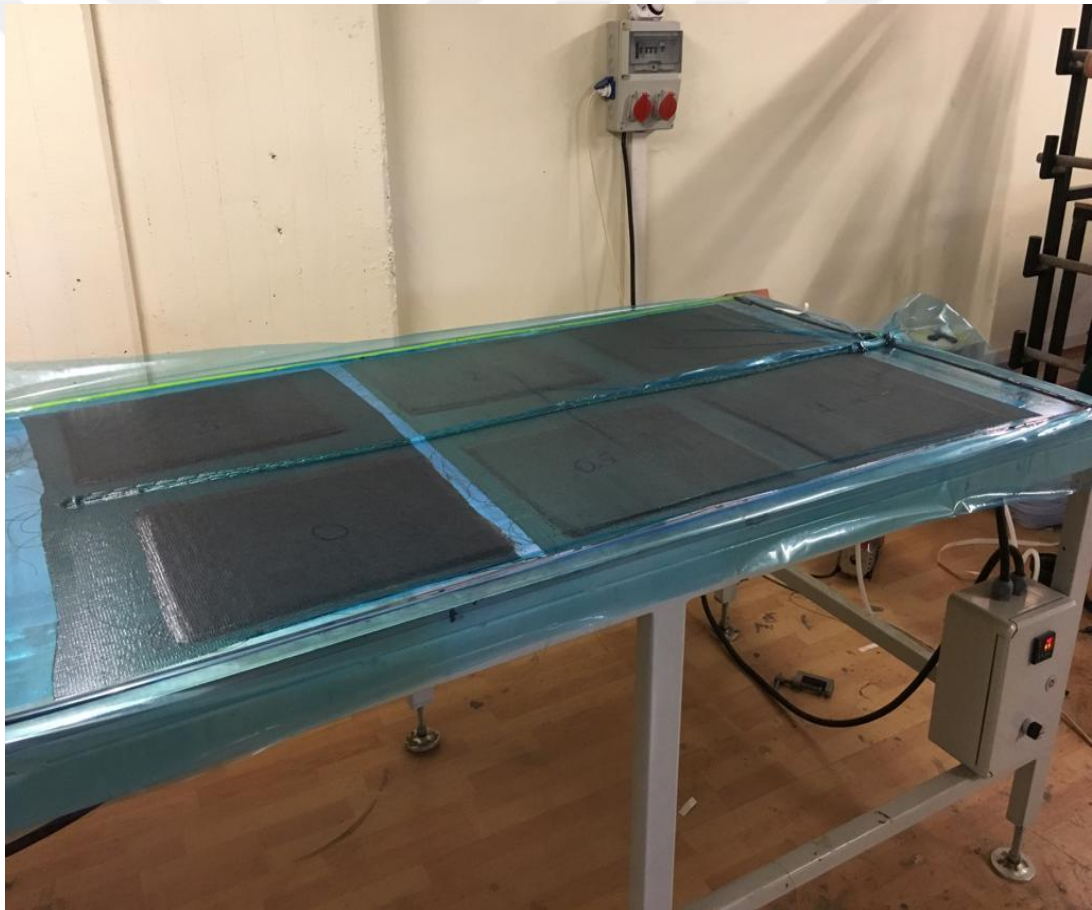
Stacking and Preparation for Vacuum Infusion Molding of Composites
